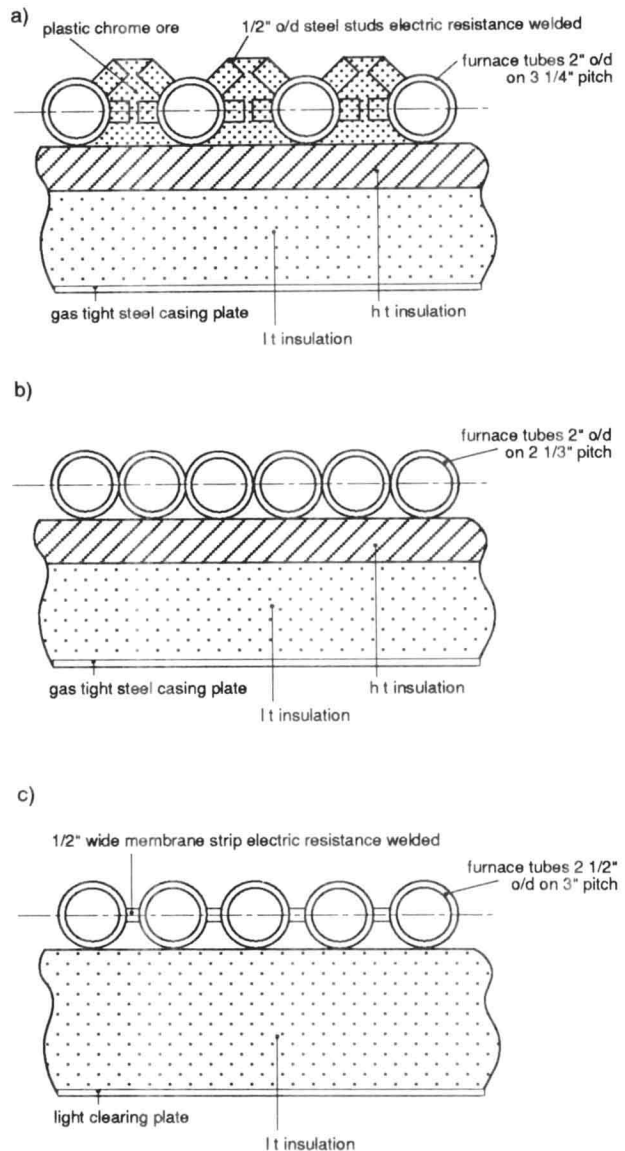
Water cooled furnace wall construction: a) stud tube; b) tangent tube; c) membrane tube panel (monowall).
